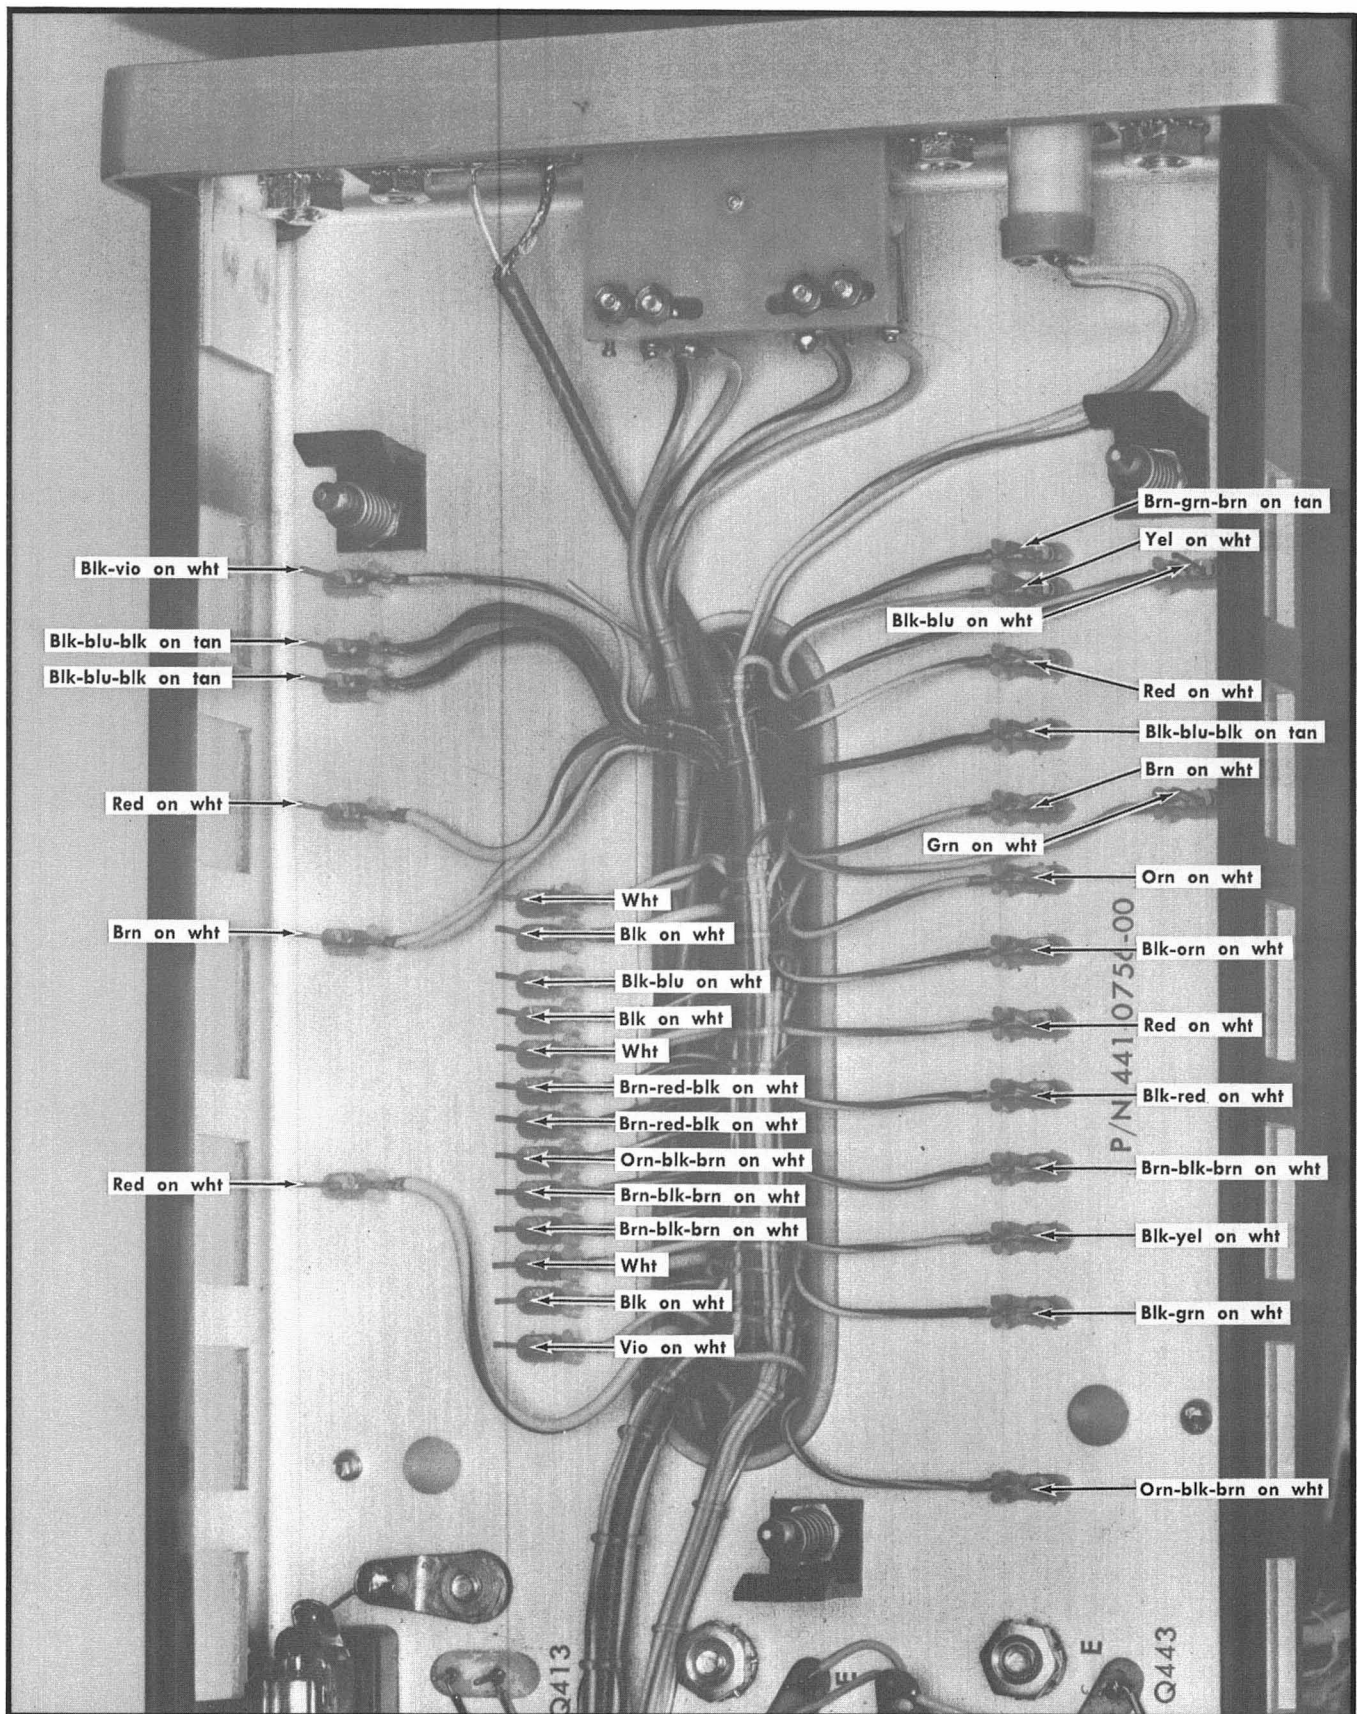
Connecting pins and wire colors, Power Supply.
